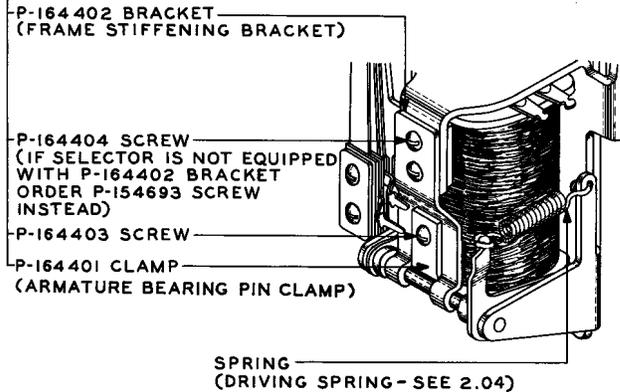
200-, 206-, 209-, and 211-Type Selector — Driving Spring, Armature Bearing Pin Clamp, and Associated Parts
